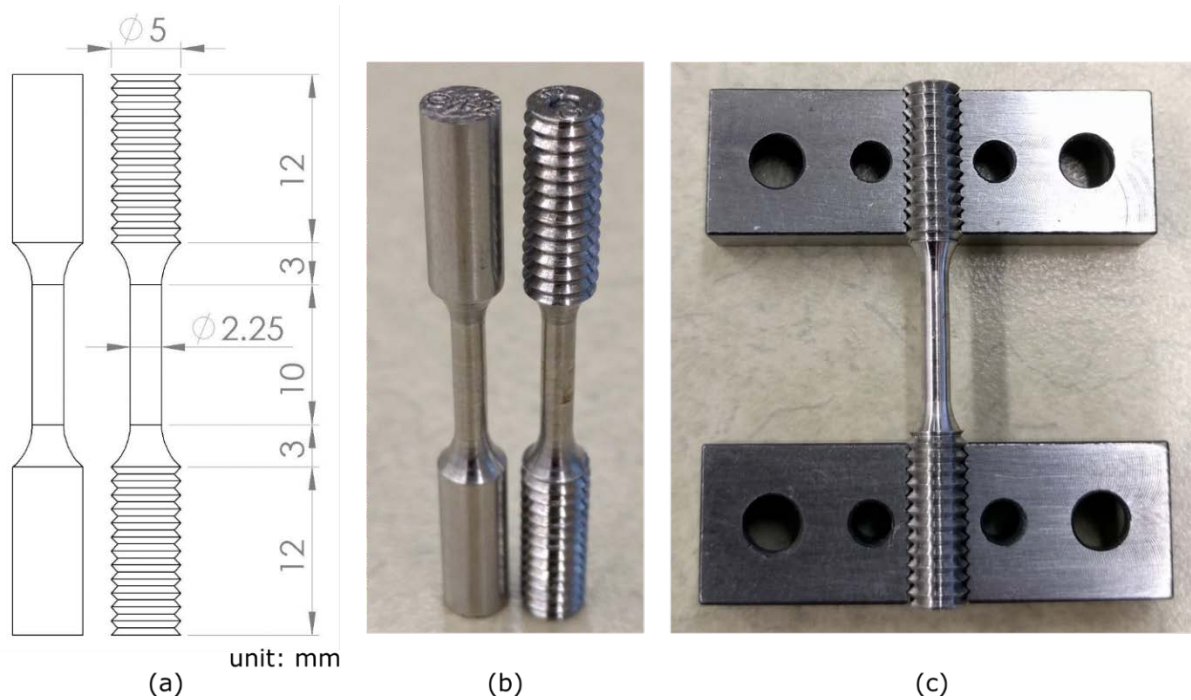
(a) Designs of final shape, (b) picture of specimens after machining, and (c) a specimen fit to grips
